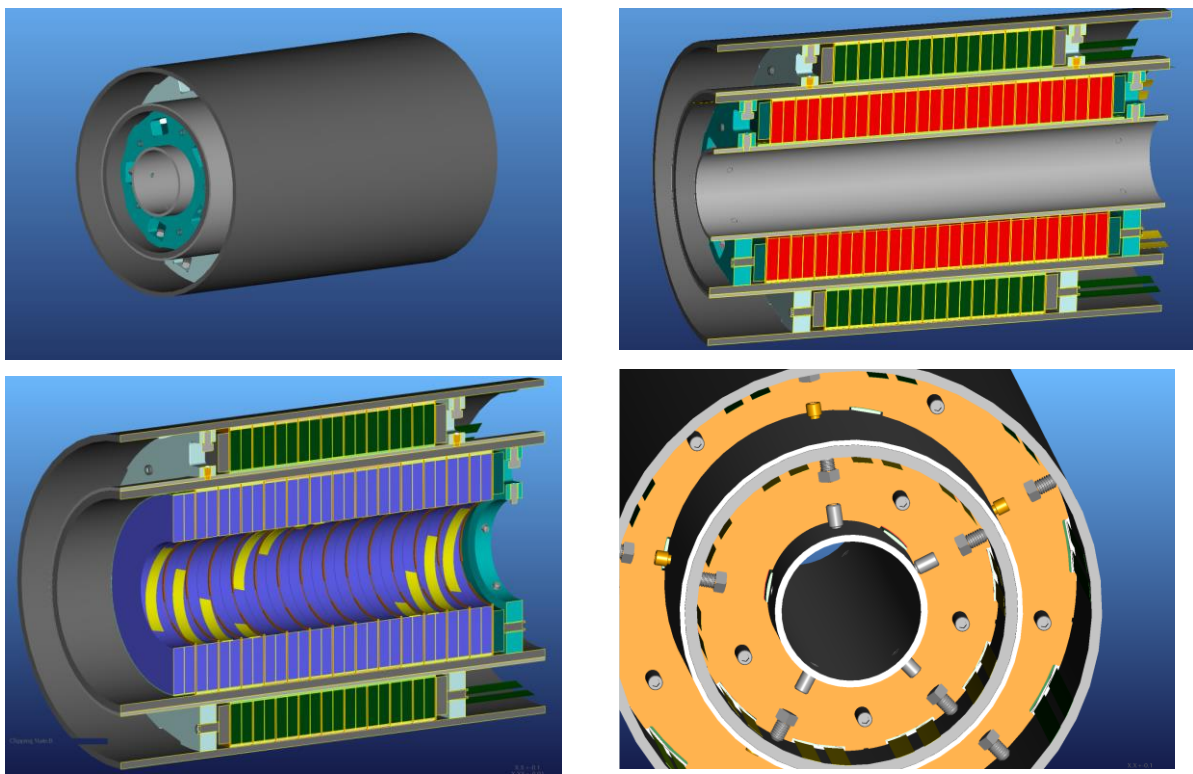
Engineering design of the mechanical structure and magnet assembly.
